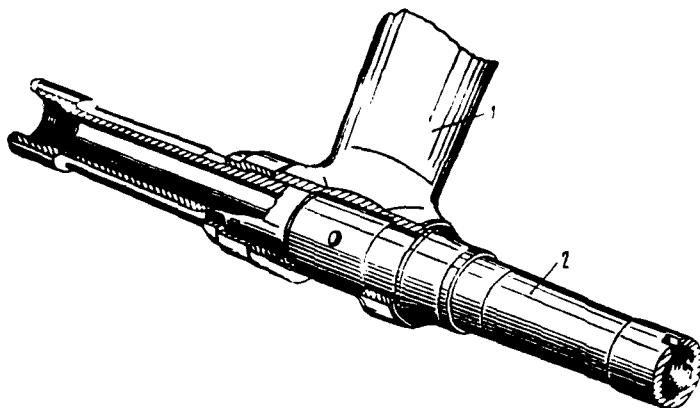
Connection of lever with axle of wheel of nose wheel strut of landing gear of aircraft 1 - lever; 2 - wheel axle.
